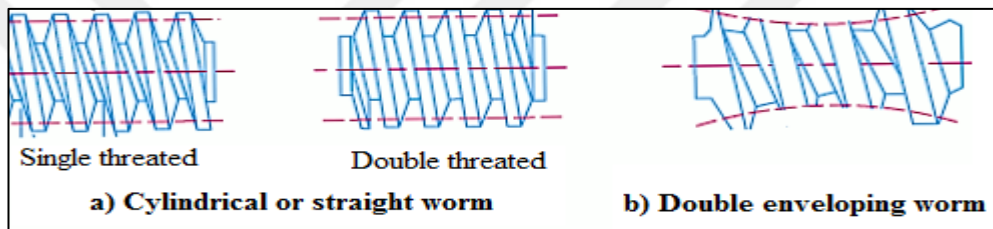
Types of worm gears (Khurmi & Gupta, 2005)
